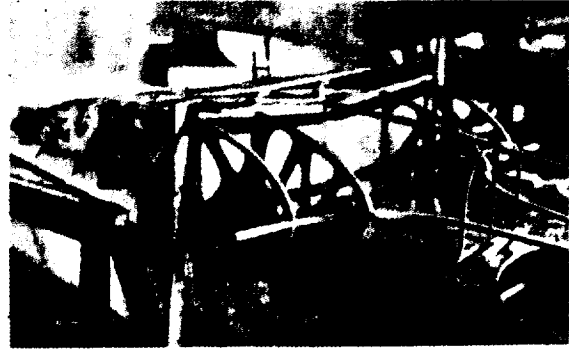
Wing fuselage connection and center section with fittings, "Fafnir".
